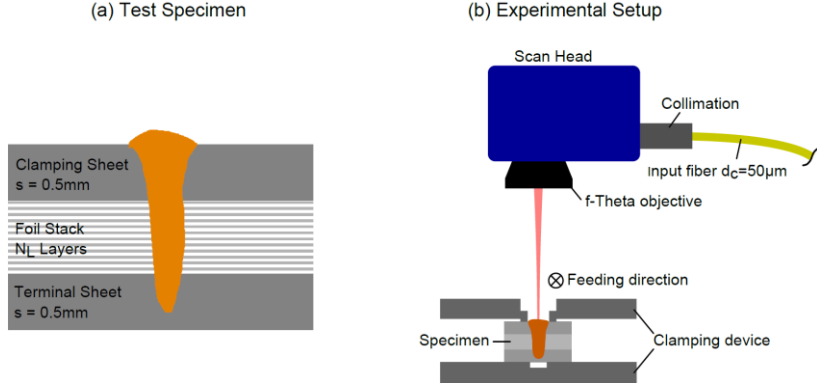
(a) Weld configuration of an aluminum stack with N_L layers of Al99.5 foils (thickness $20 \mu\text{m}$), aligned between an Al99.5 terminal sheet and a clamping sheet ($s = 0.5\text{mm}$) in a sandwich configuration; (b) Experimental setup.
